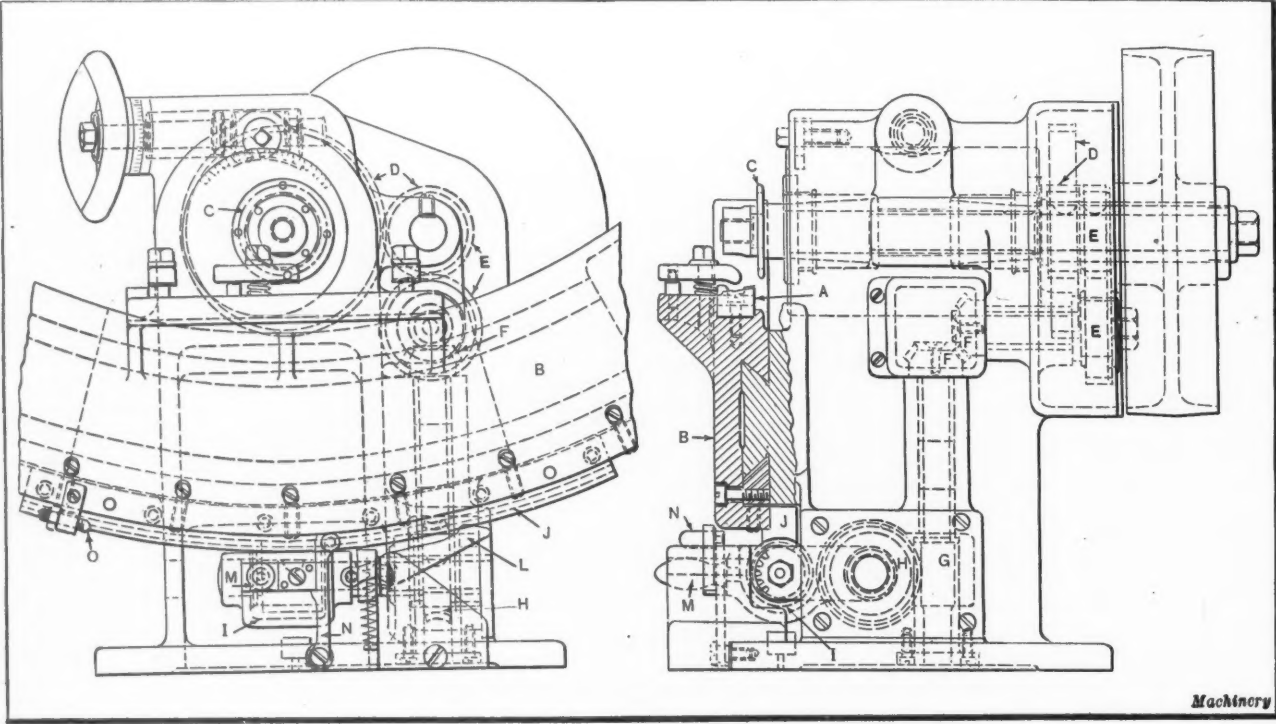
Assembly Views of the Sub-lever Segment Wire Groove Milling Machine
